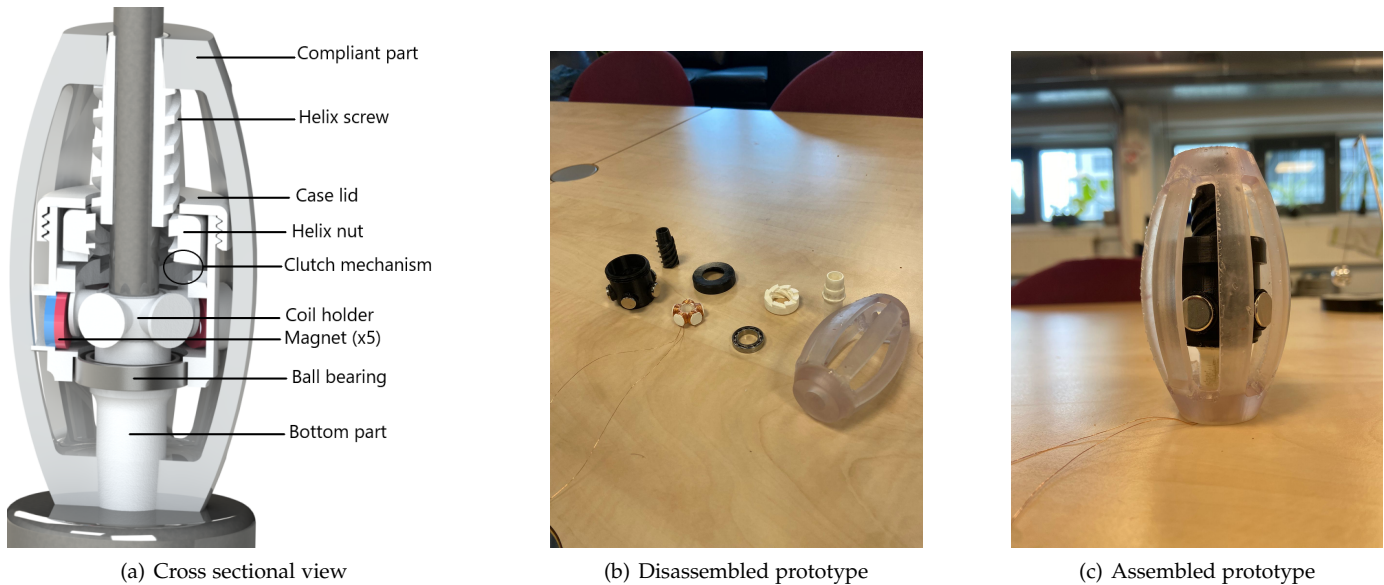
The compliant spring - prototype design. The prototype is built and does not need the piston shaft or an additional axis. Each coil has 100 windings. The images from left to right show a cross sectional view of the design (a), a disassembled view (b) and an assembled view (c).
